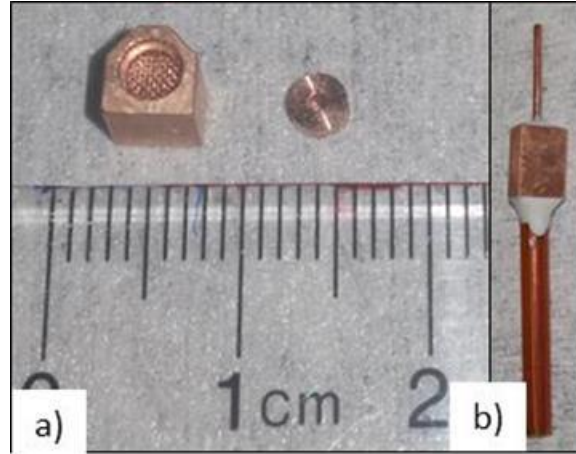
Copper evaporator block with copper mesh diffusion bonded in place next to a copper cap. b) Fully assembled evaporator block and Kapton tube for thermal standoff.
